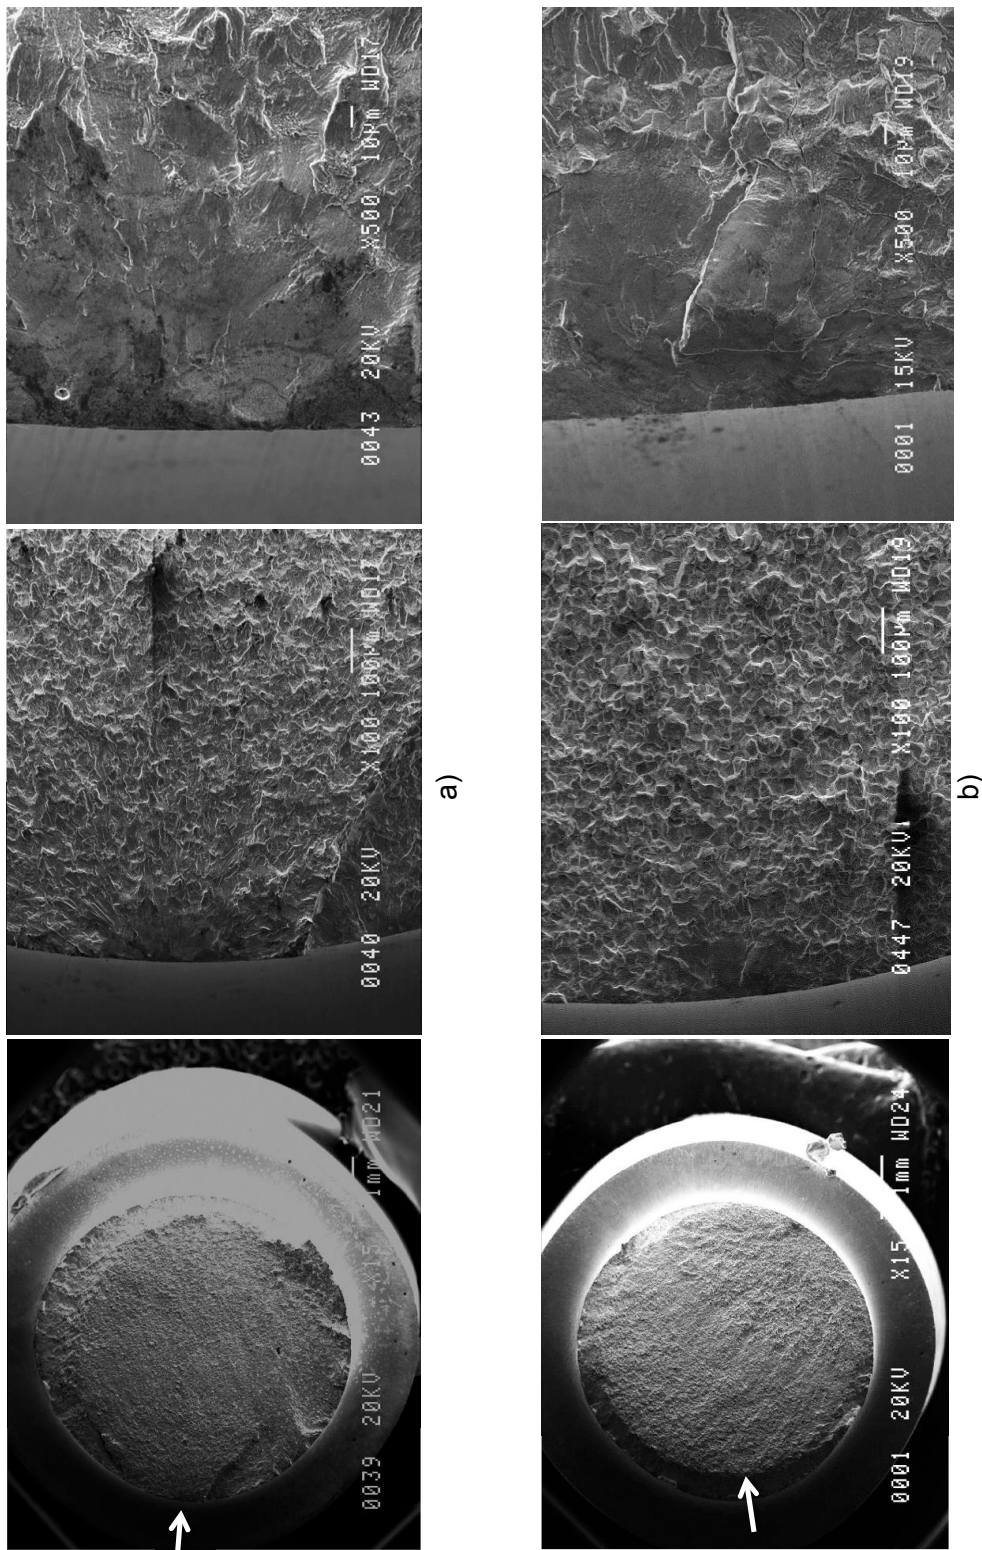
Typical failure initiation sites of ME3 notched gage specimens, after altered conditions: a) exposed 815 °C-440 h in vacuum, S101A-NEW5, 53,309 cycles; b) Blank aged 815 °C-2,020 h before specimen machining, S101A-NEW1, 71,480 cycles.
